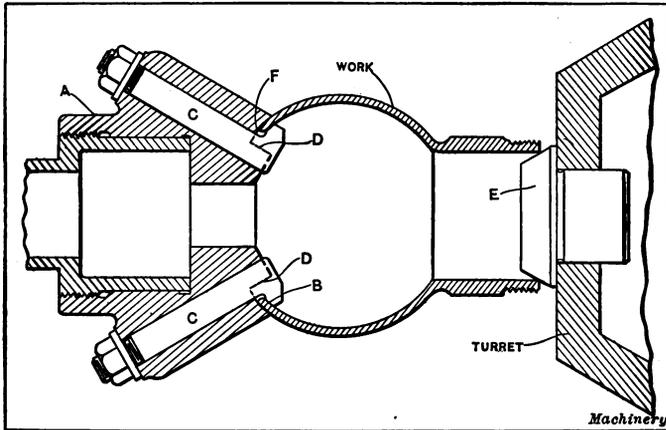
Fixture for Ball-and-socket Pipe Joint
